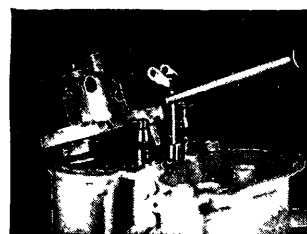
Raise vacuum piston and link and install bowl cover with parts attached
